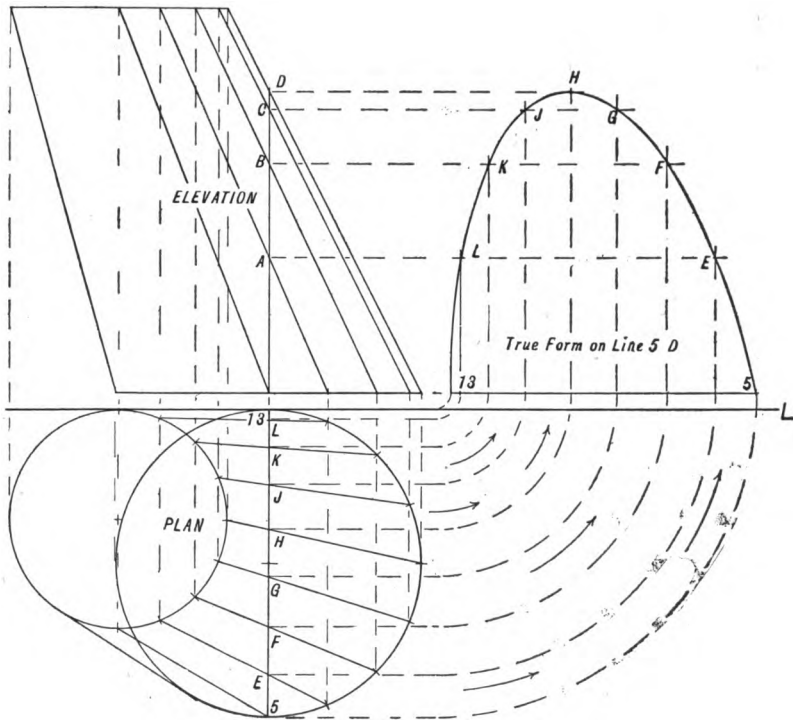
Plan, Elevation, and True Form of Section When It is Required That the Fitting Be "Flat on One Side."
